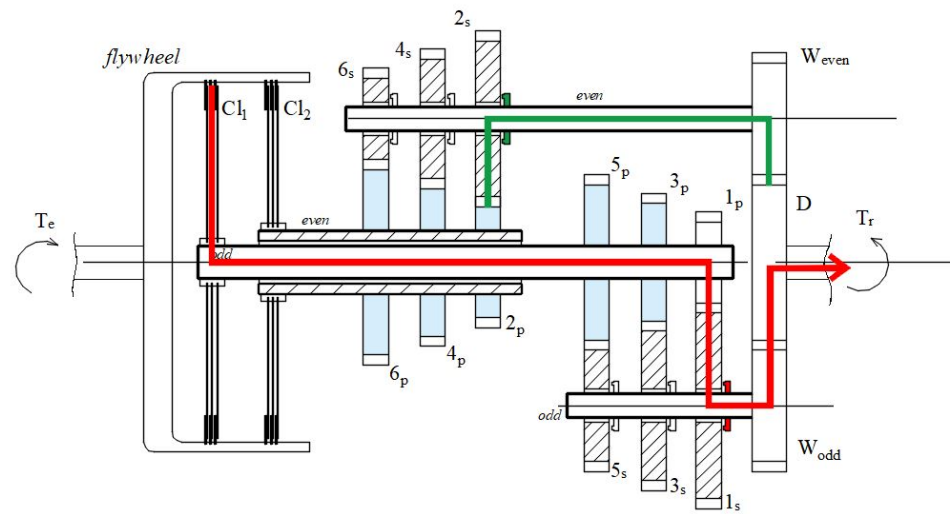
The DCT gear shifting transient: 1st gear running, 2nd gear pre-selected.
